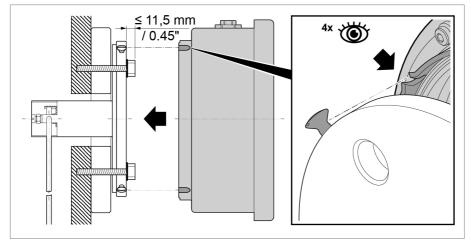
Mounting the transmitter part with gasket (example, parameters depending on mounting method)
